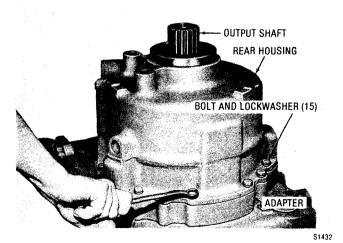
Removing rear housing bolts (TRT 2221-3, 2421-3 with overdrive)
